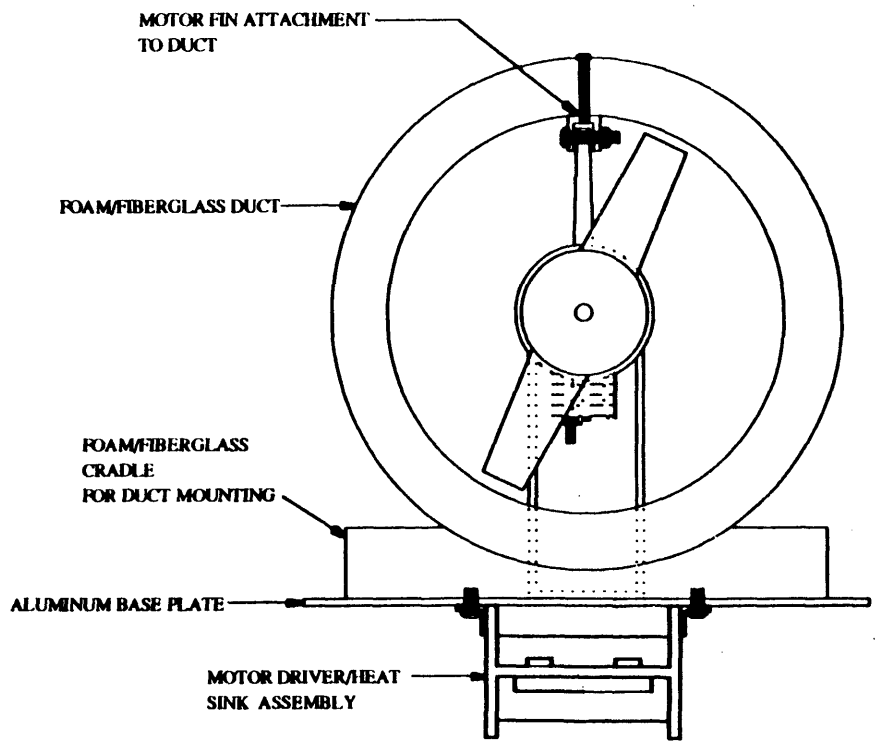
shows the entire thruster assembly, except for the plastic grilles which cover the ends of the duct; the grilles were left out of this drawing to provide a clearer understanding of the assembly. The thruster assembly consists of the following items: the electric motor and propeller, the duct with fiberglass mounting cradles, the motor driver circuit mounted on its heat sink, an Aluminum base plate, an Aluminum motor mount, and a piece of Aluminum U-channel that was used to rigidly attach the fin of the motor to the duct. This attachment was deemed necessary after an examination of ASTRO's thruster design. ASTRO's electric motors were cantilevered off of a motor mount into the duct; this arrangement proved too weak to withstand motor vibration, with the result that the propeller contacted the inside of the duct.
